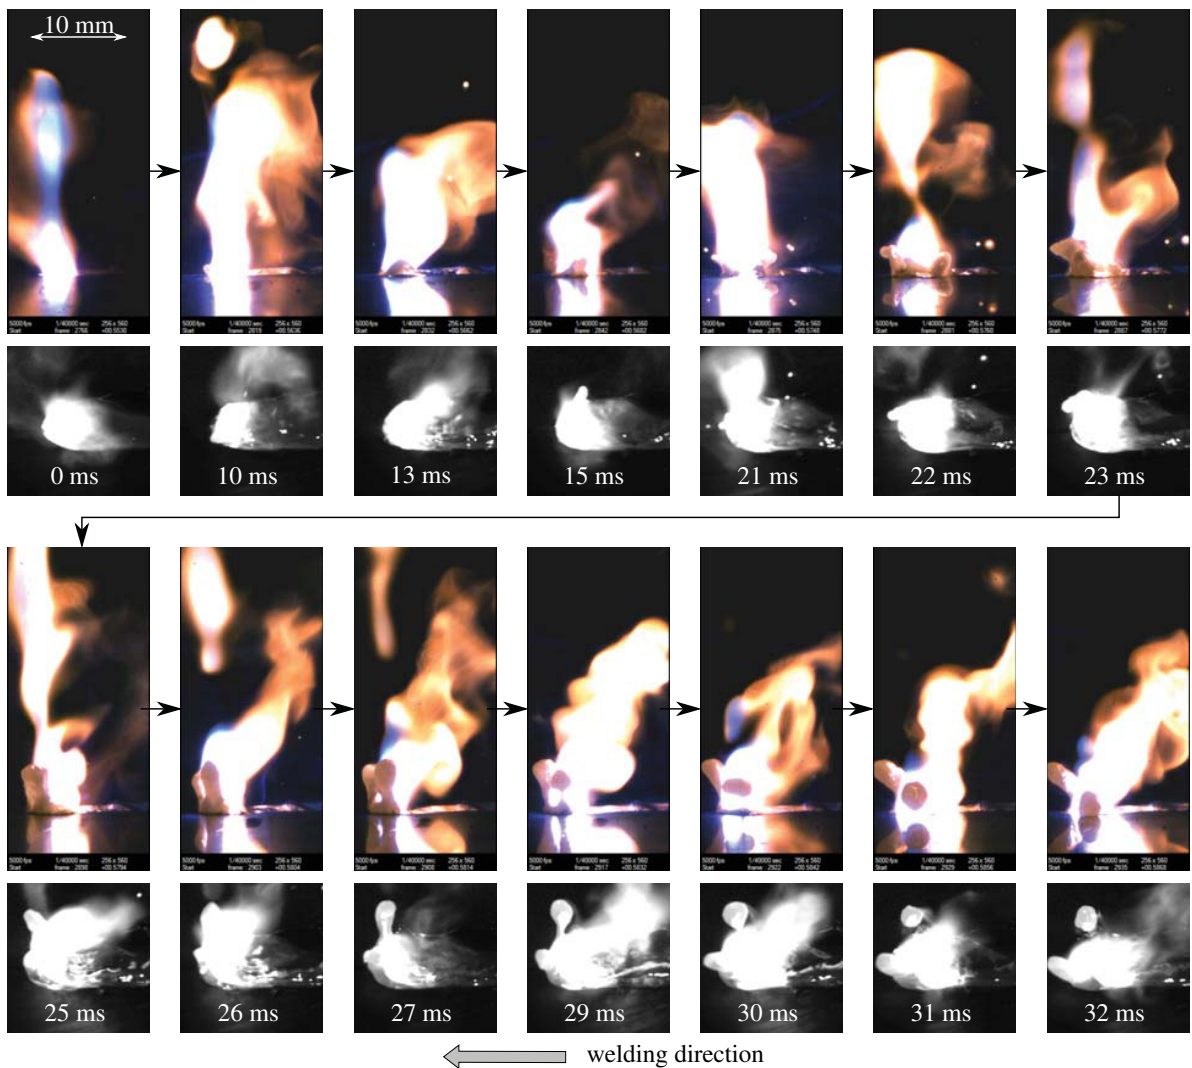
High-speed image of the welding test with 10 l/min inert gas. Welding parameters: laser power 17.6 kW, focus -8 mm, welding speed 1.8 m/min, shielding gas Argon. Top: vapor plume. Bottom: weld pool.
